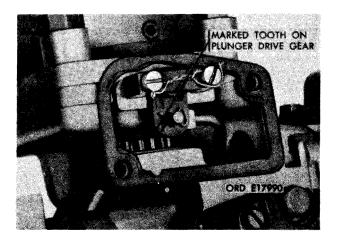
CHECKING MARKED TOOTH POSITION THROUGH FUEL INJECTION PUMP TIMING WINDOW COVER .
